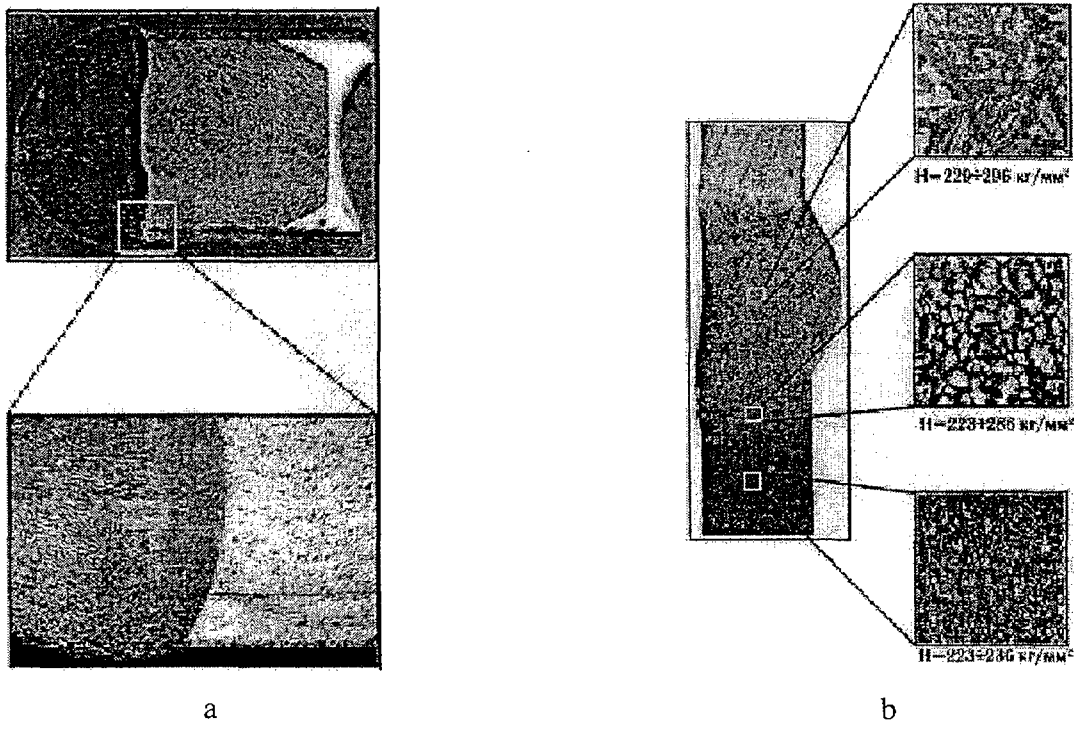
Multipass weld of fuel pin (a) and SA (b)
